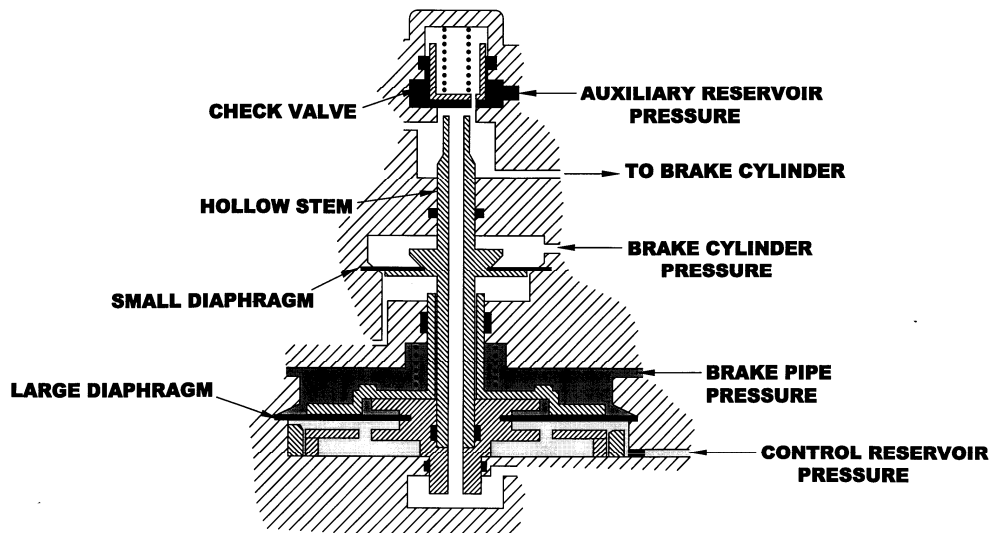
SECTIONAL VIEW OF MAIN VALVE
